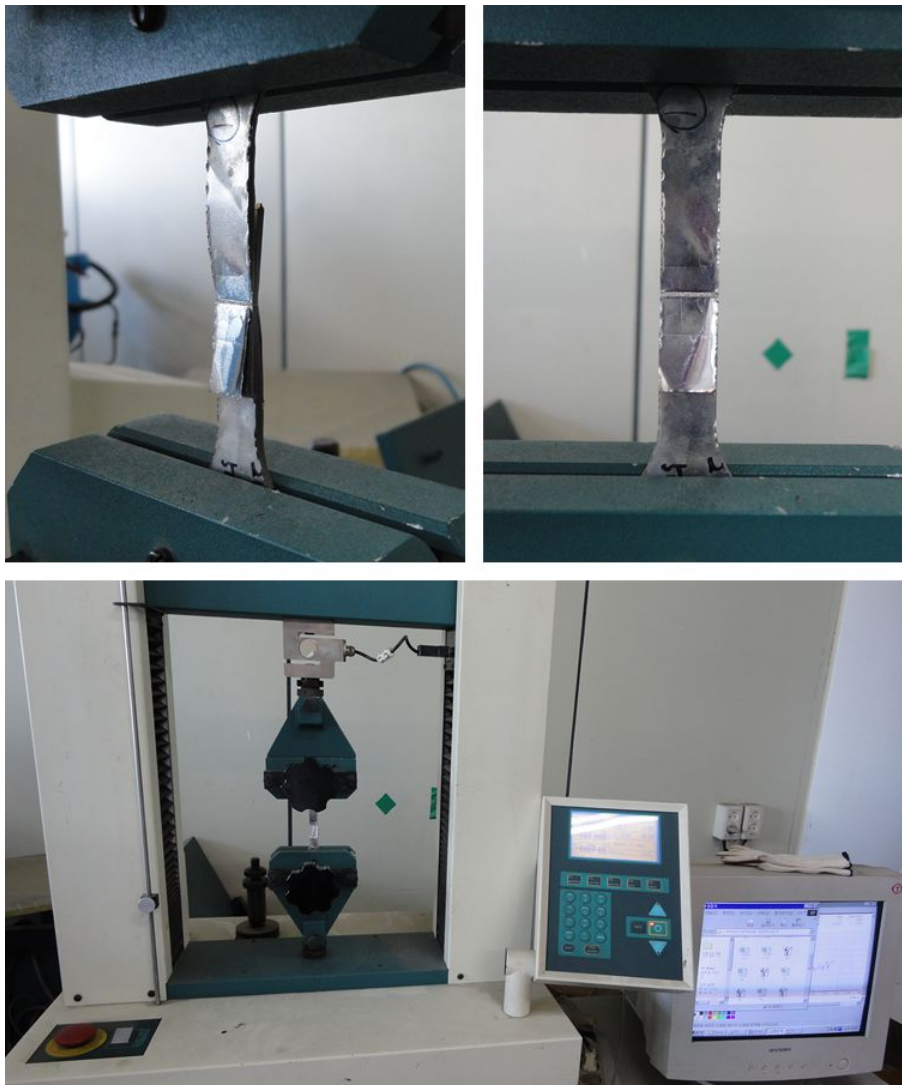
Tensile test Experiment Equipment of Lap-Joint Welding
